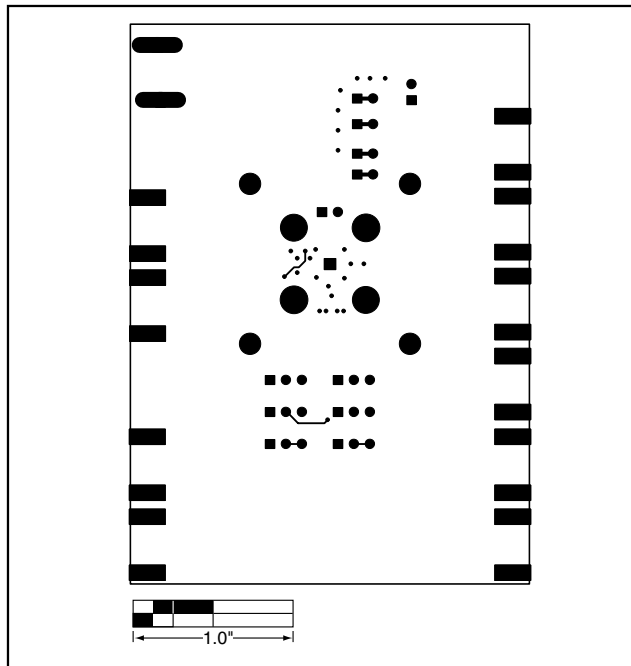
MAX3873A EV Kit PC Board Layout—Solder Side
